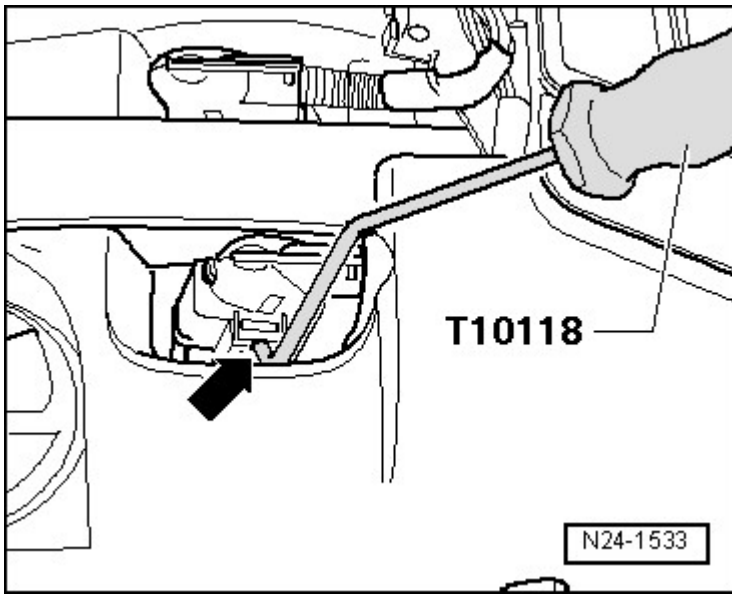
Disconnecting Electrical Harness Connectors To Ignition Coils
